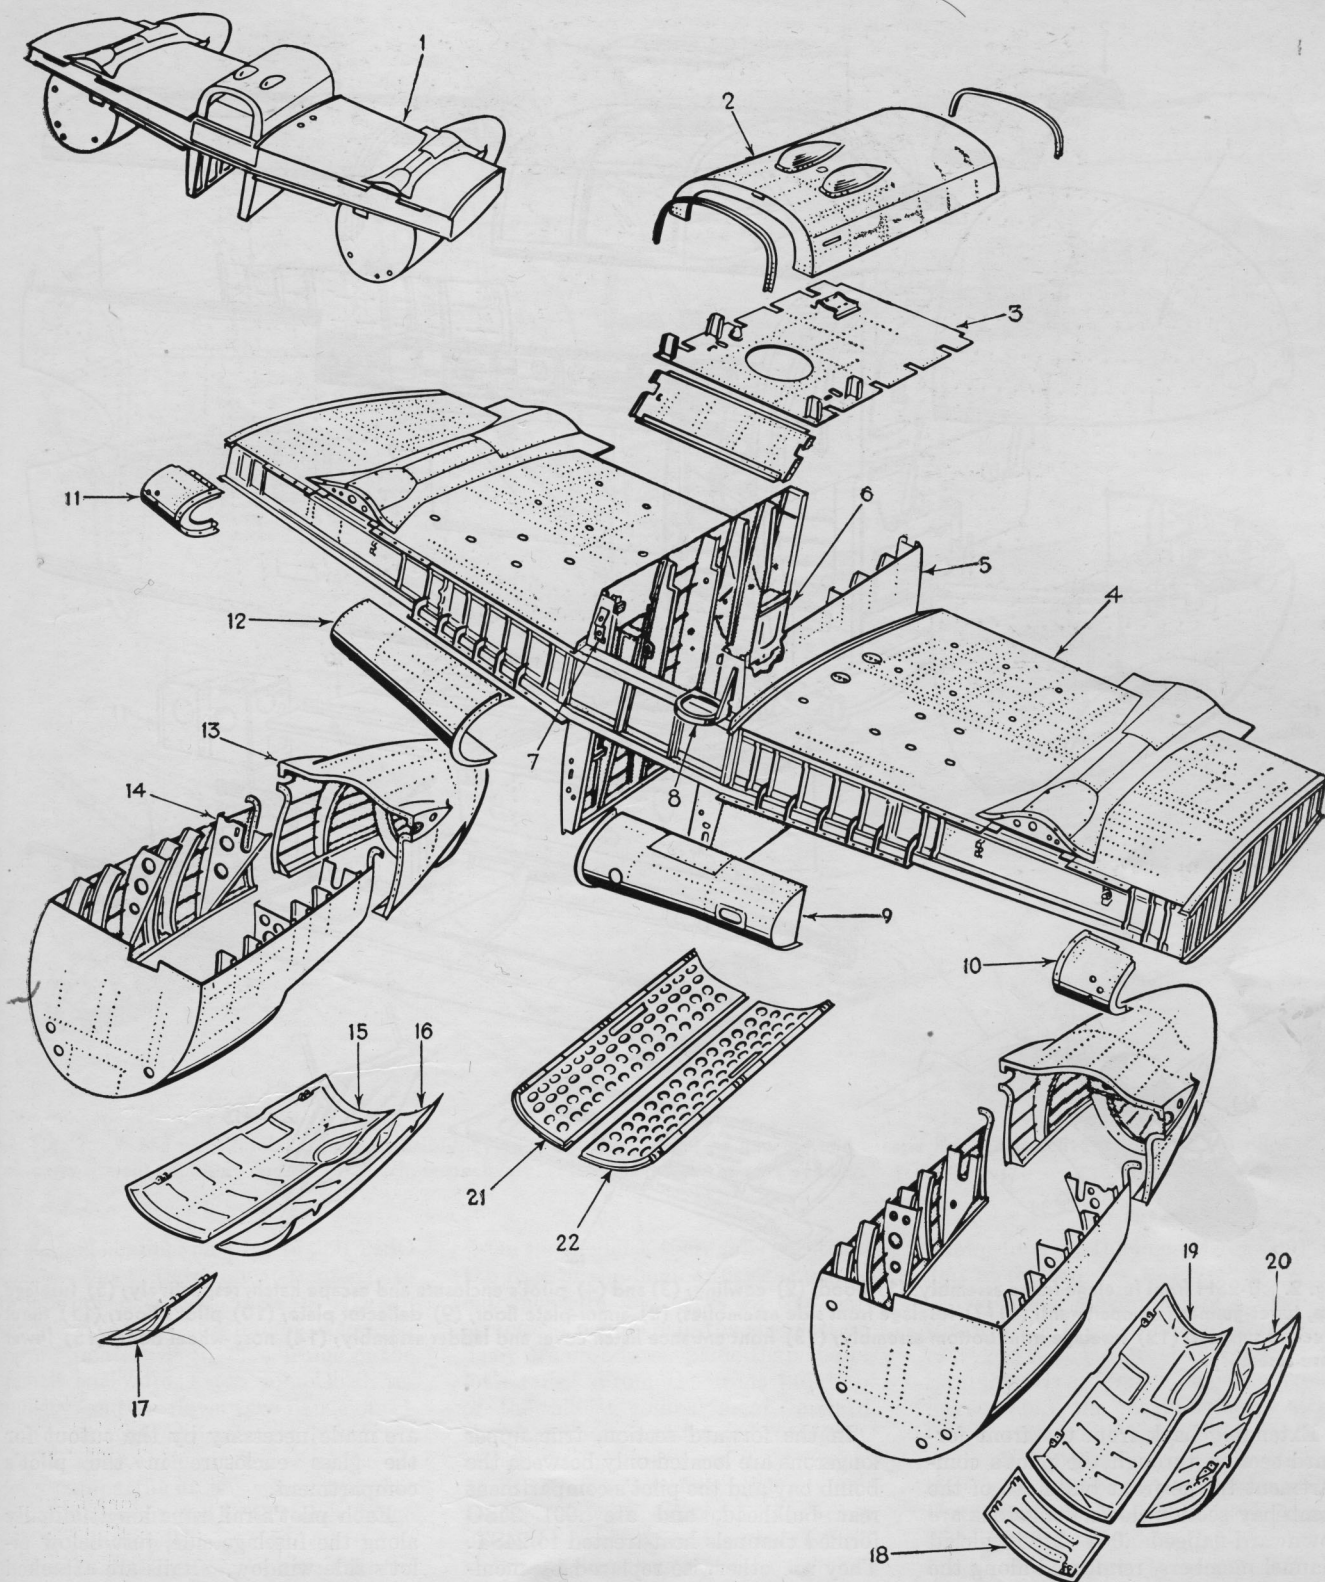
Fuselage intermediate frame assembly: (1) composite structure; (2) top frame; (3) crawlway floor assembly; (4) center section covered assembly; (5) bomb-bay fuselage side assembly; (6) bomb sling door; (7) fuel cross-feed bracket; (8) hydraulic reservoir support; (9) to (12) wing nose assemblies; (13) nacelle, aft; (14) nacelle, forward; (15) to (20) main landing gear doors; (21) (22) bomb-bay doors.
